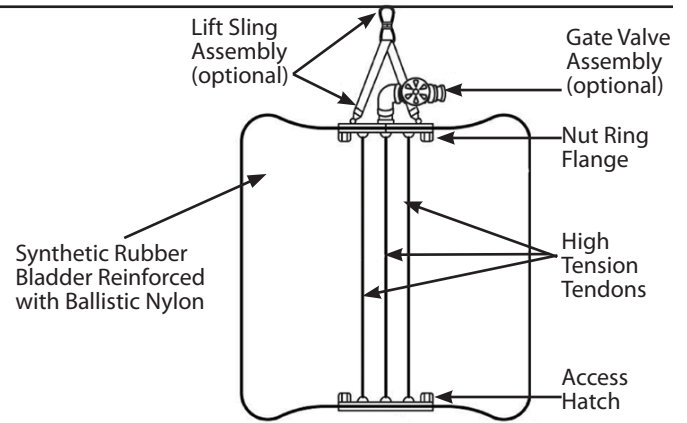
Section view of the Pro Barrel® with nut ring flange and access hatch closures, optional gate valve and lift sling assemblies.
